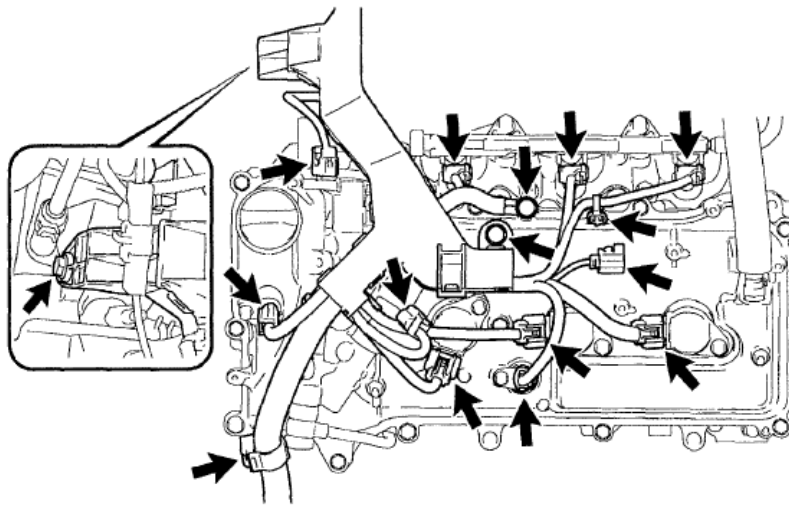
Removing Bolt, Nut, And Manifold Stay
